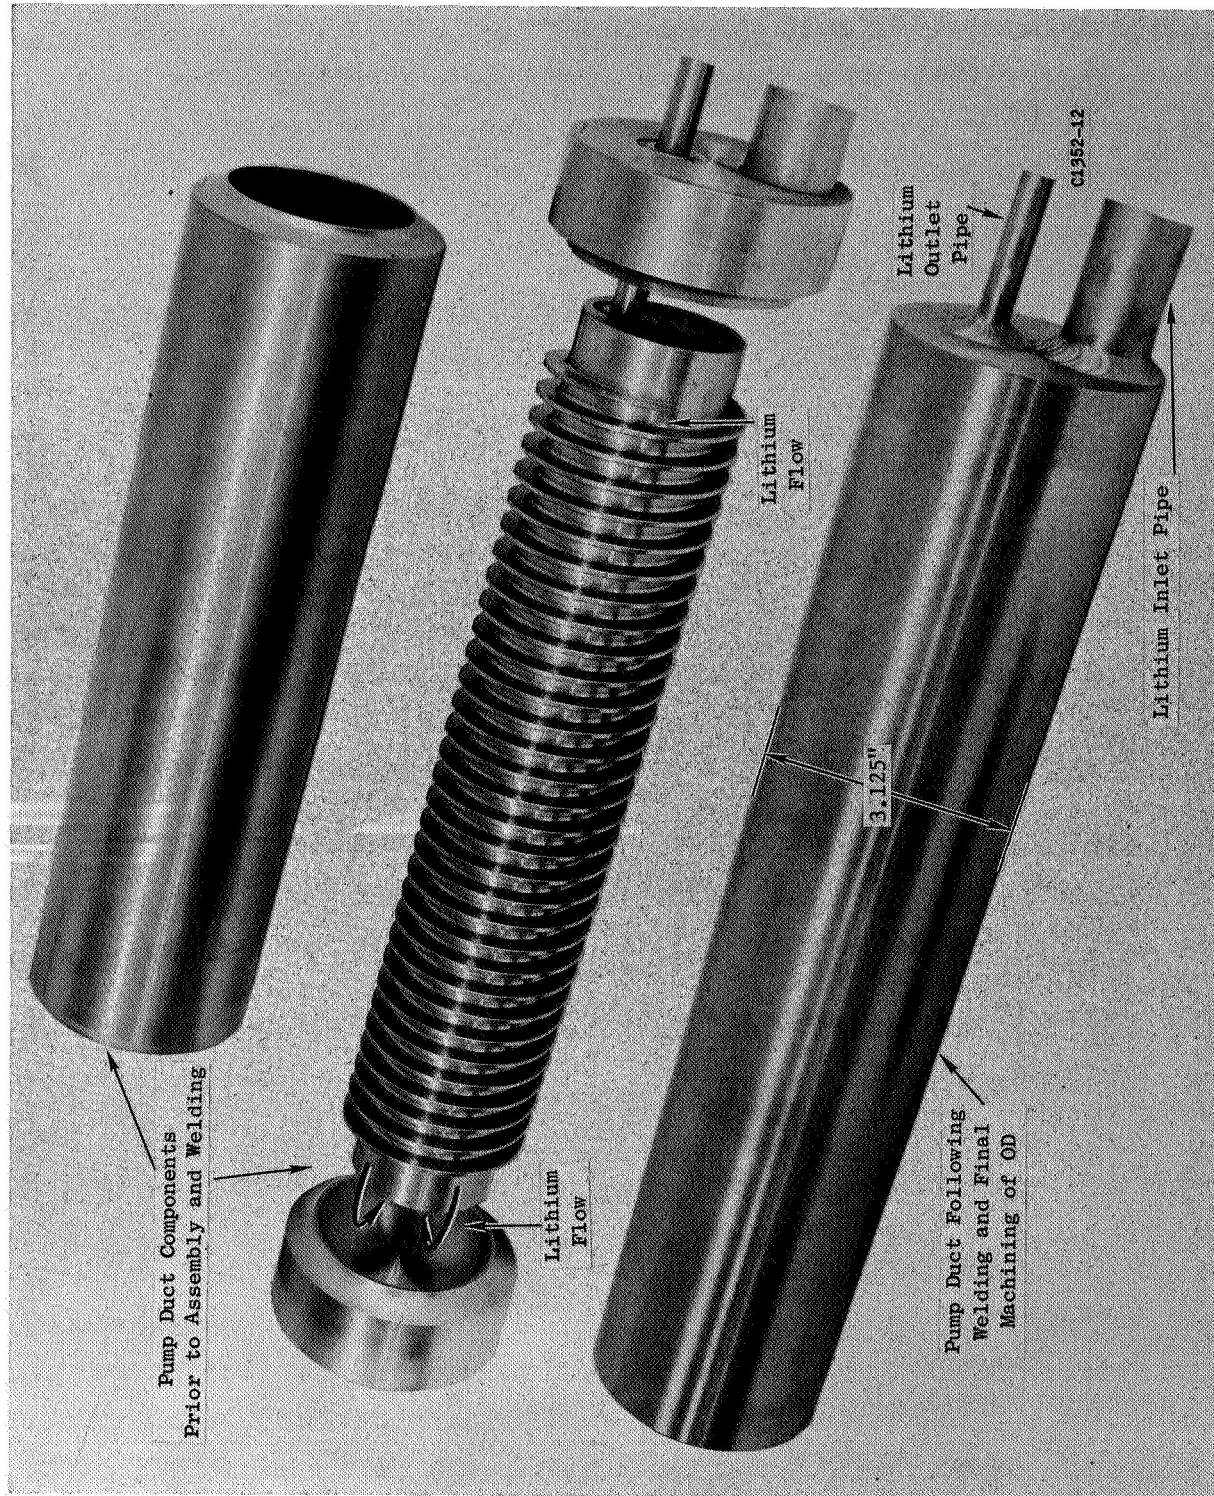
Components of the T-111 EM Pump Duct Before and Following Final Welding and Machining.
